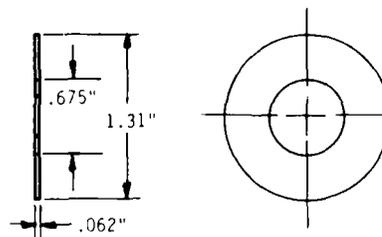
FSM detector rear housing; unless otherwise specified, tolerances are  $\pm .002$
